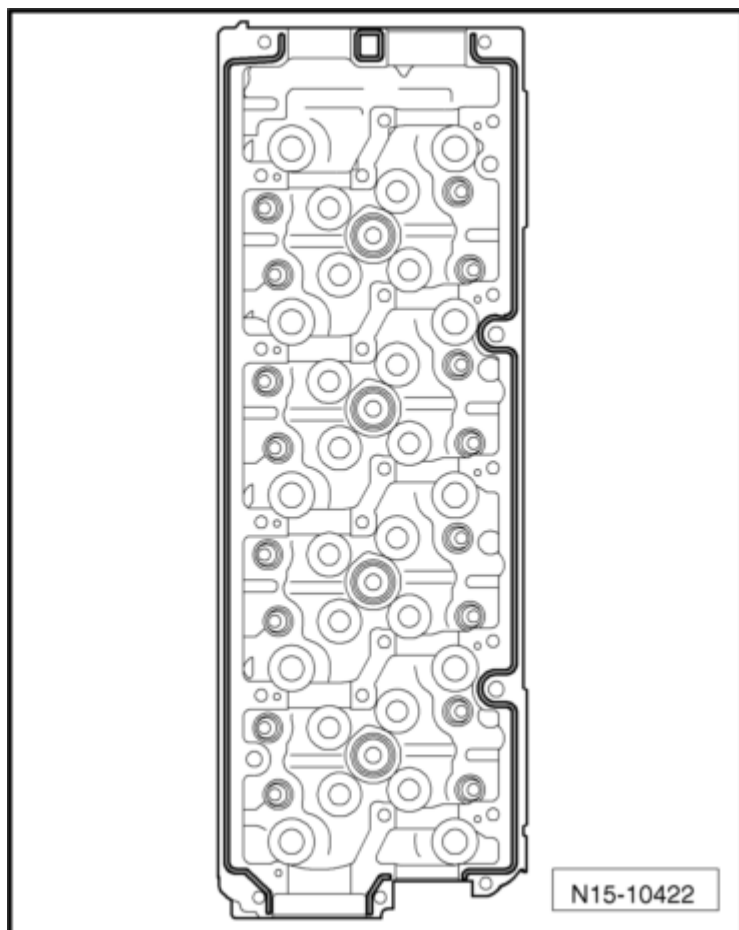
Identifying Silicone Adhesive Sealant Pattern
